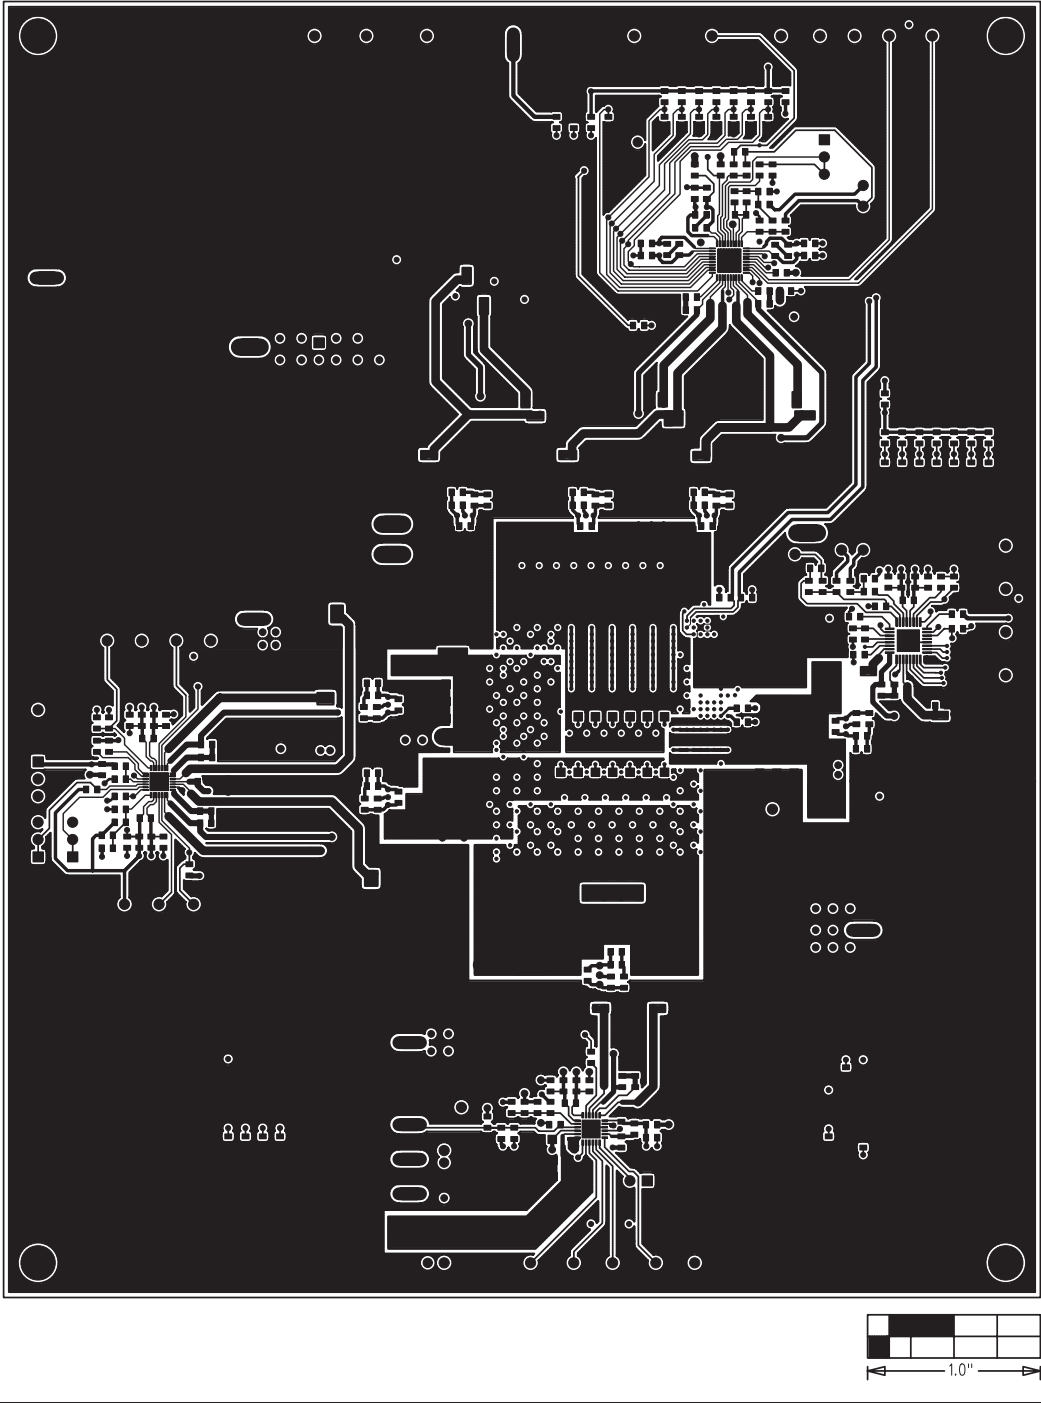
MAX17030 EV Kit PCB Layout—Solder Side
